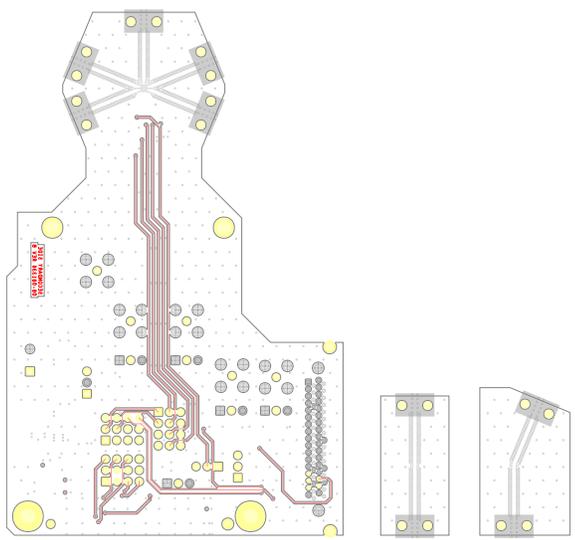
EVAL-ADGM3144SDZ Component Side, Bottom Side PCB Drawing (Layer 4)
